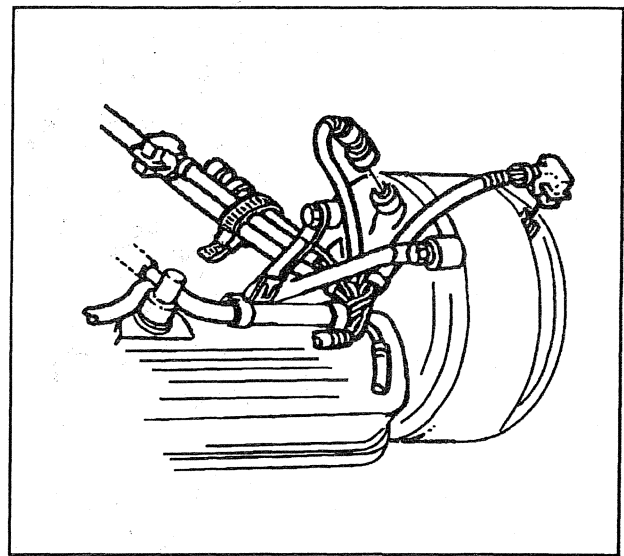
Engine Wiring to A/C Compressor (7.4L)
